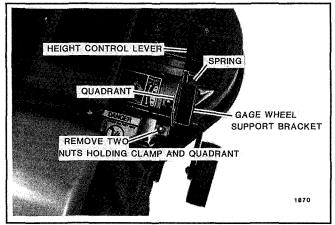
Install Height Control Lever - 42" Rear Discharge Mower
